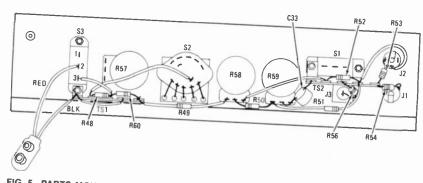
PARTS MOUNTED AND WIRED entirely on the front panel.
